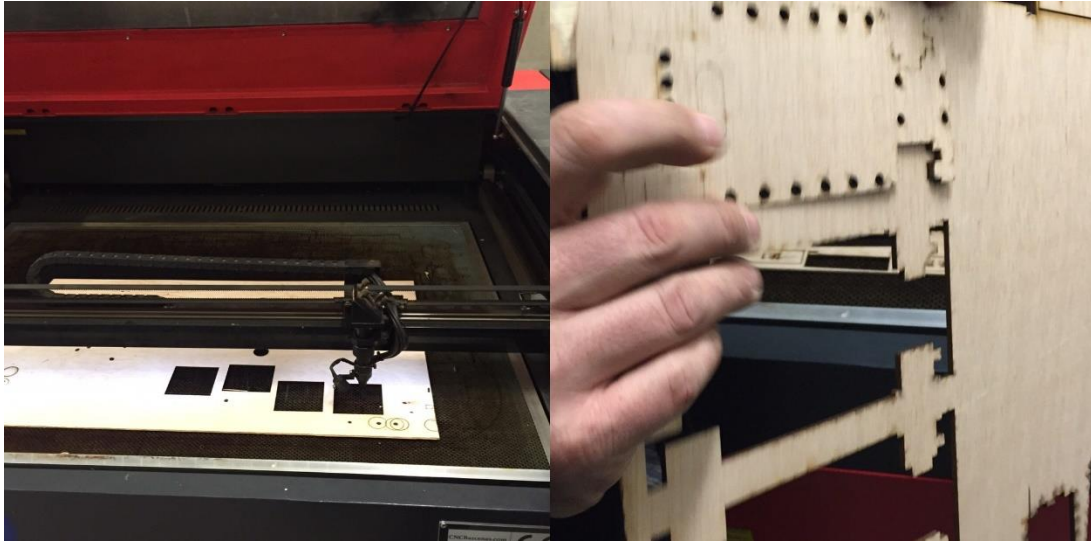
Plywood getting cut in the laser cutting machine (left) Cut base parts taken out of plywood(right)
